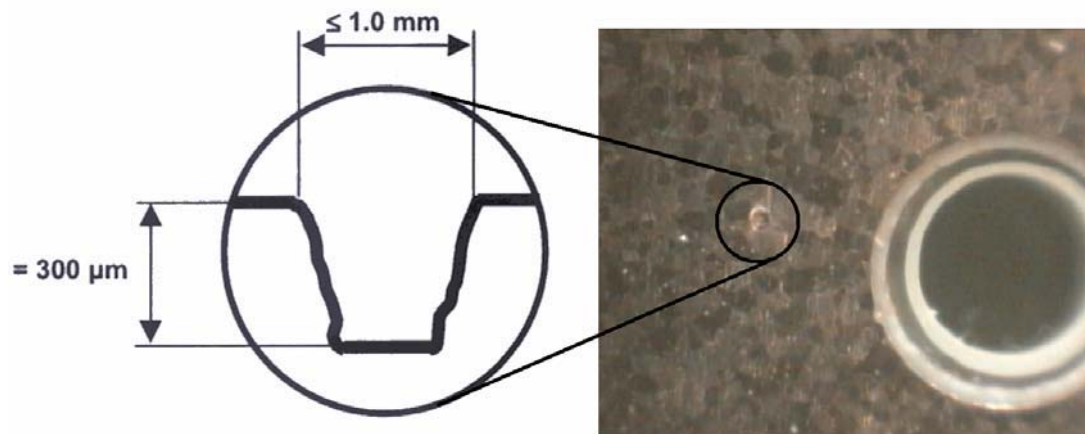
Acceptable etching hole at the MiniSKiiP bottom surface
